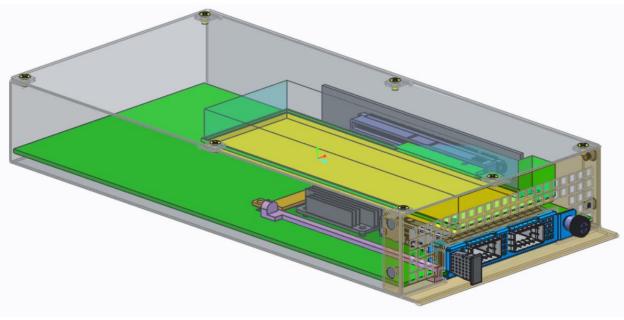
Small Card Thermal Test Fixture Preliminary Design
